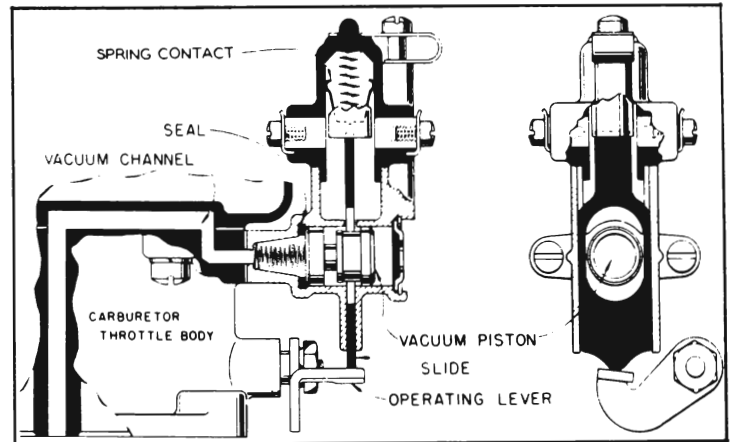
Stromberg Accelerator Vacuum Switch—Engine Running at Closed Throttle
